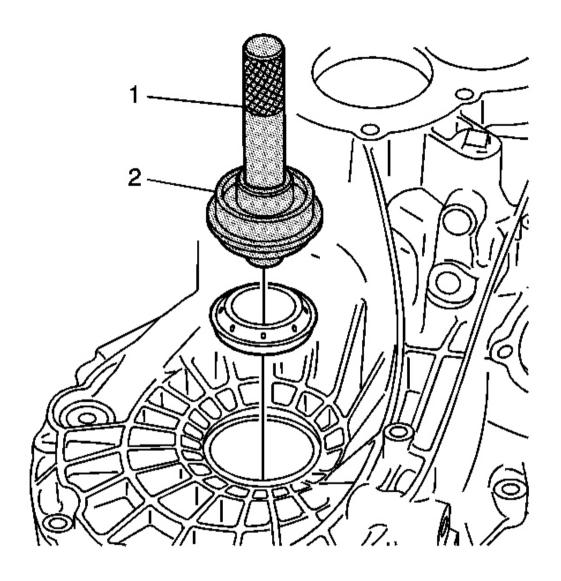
Installing Differential Bearing Race Seal Courtesy of GENERAL MOTORS CORP.
